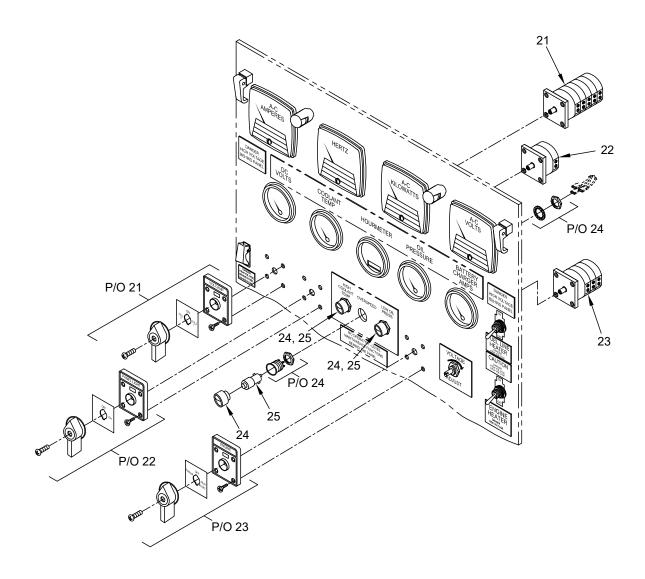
Control Panel Assembly (Sheet 3 of 4).
